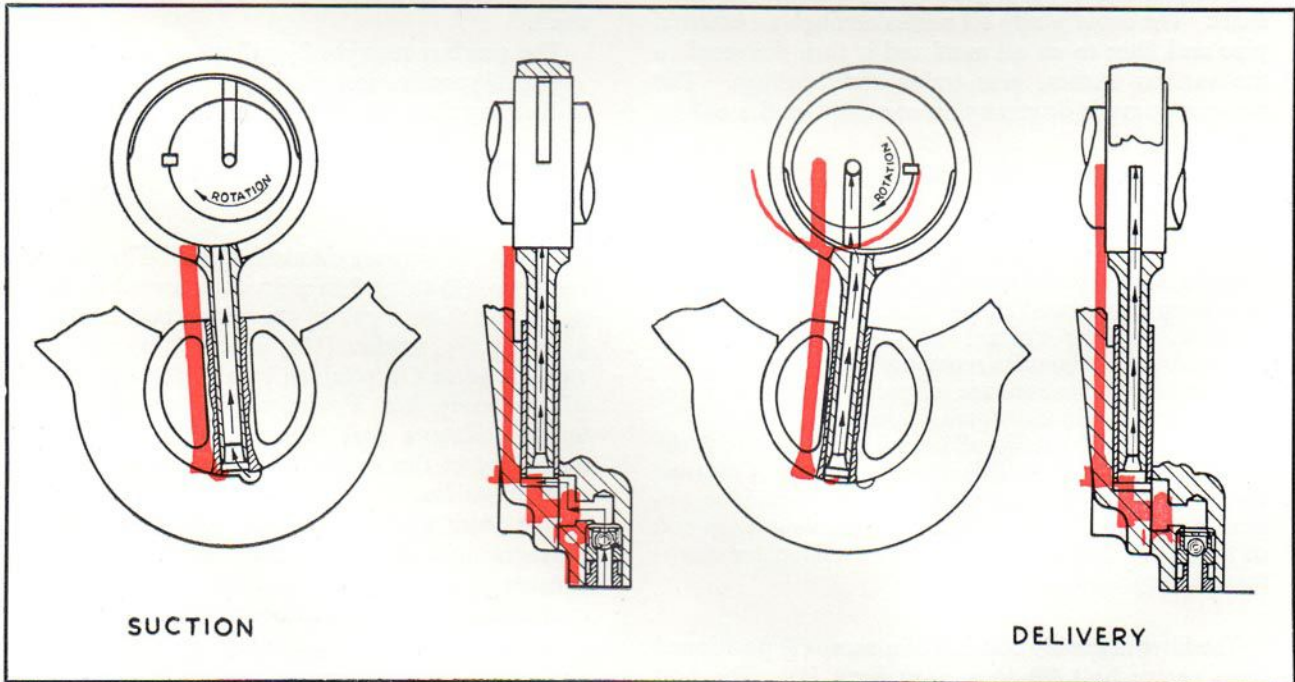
Gearbox Output Oil Pump (Plunger Type)
